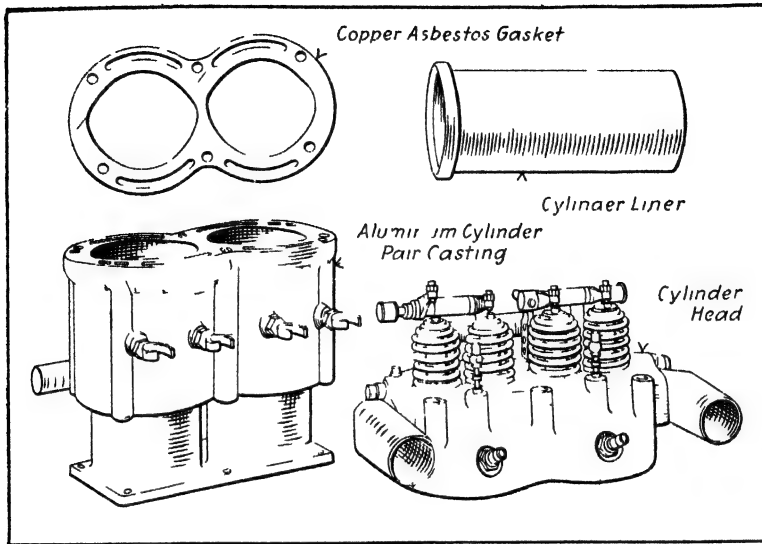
Twin-Cylinder Block of Early Sturtevant Engine was Cast of Aluminum and Had Removable Cylinder Heads and Inserted Cylinder Liners.
